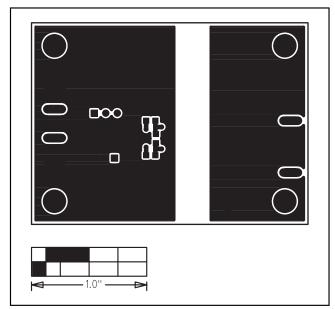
MAX256 EV Kit PCB Layout—Solder Side
